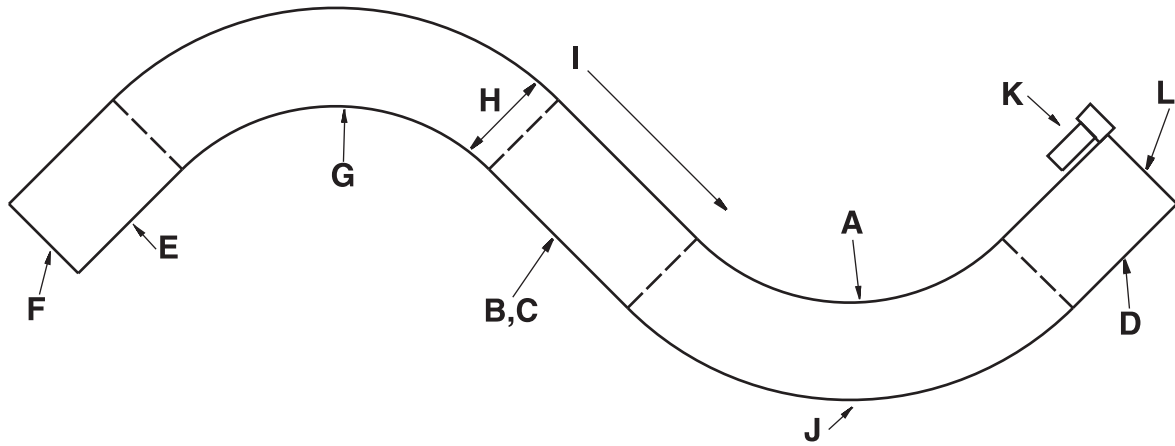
TYPICAL 2-TURN RADIUS LAYOUT
